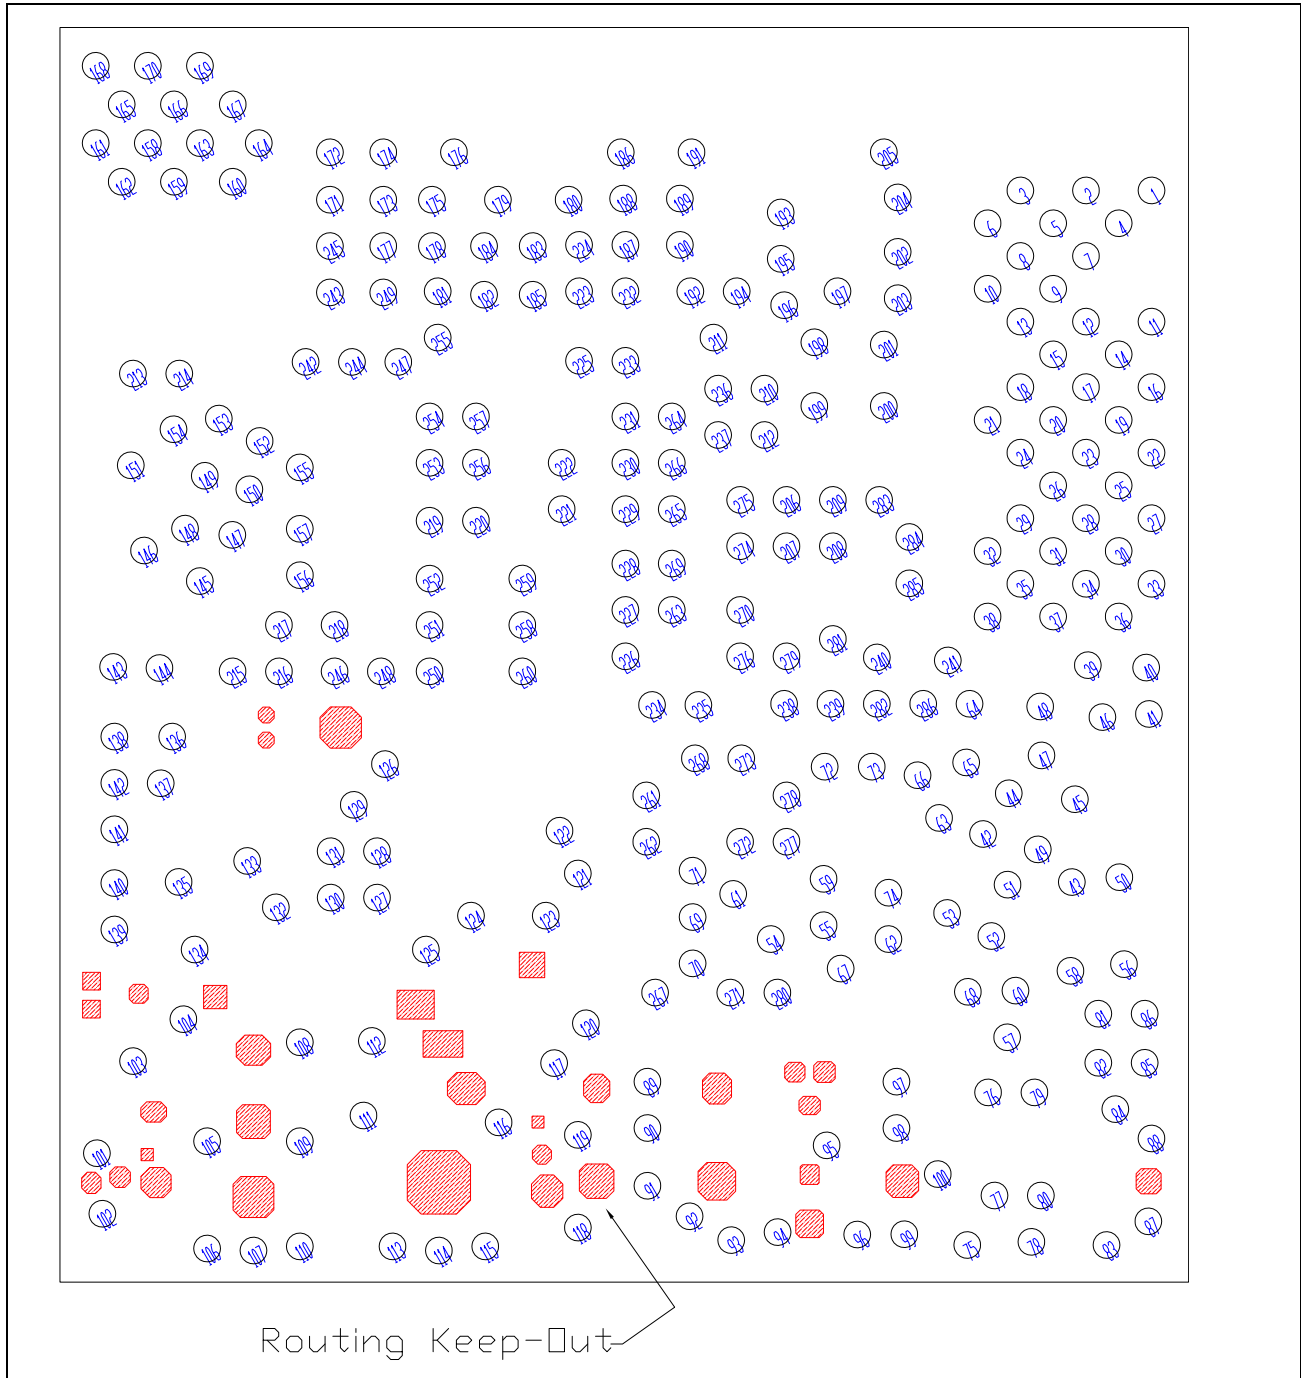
WLCSP Keep-Out Areas for PCB Layout—Bottom View, Bumps Facing Up
